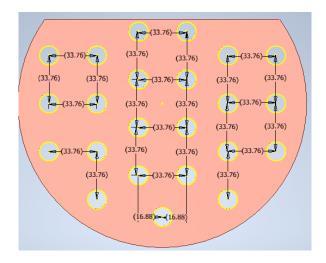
The Inner Baffle with Tube Hole Dimensions.
